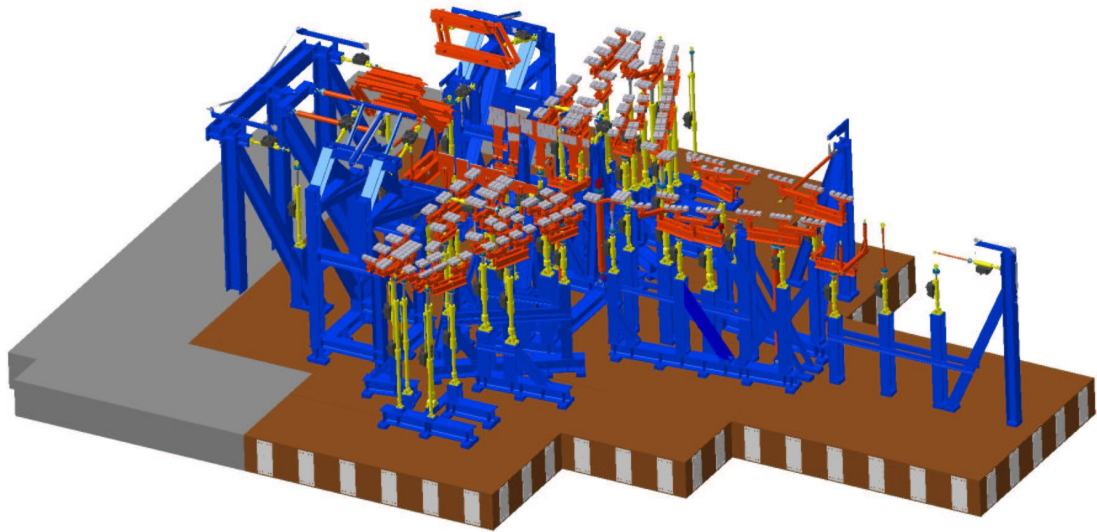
All 3 levels of the inspection platforms with staircases and inspection office
